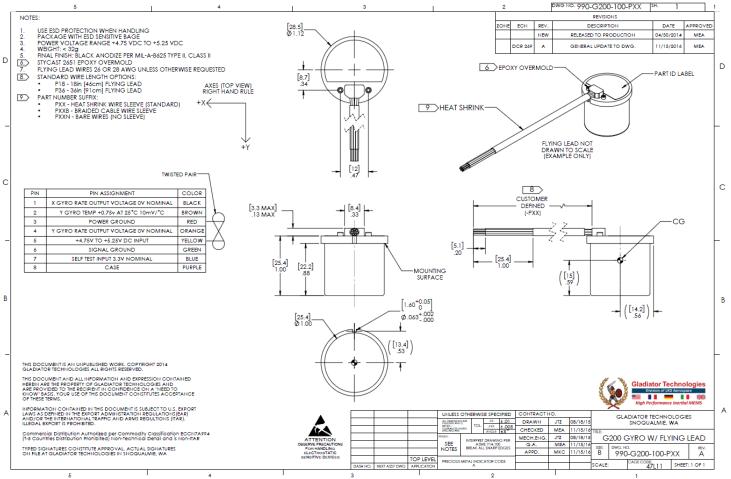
Standard Pigtail Options for G200 Outline Drawing
